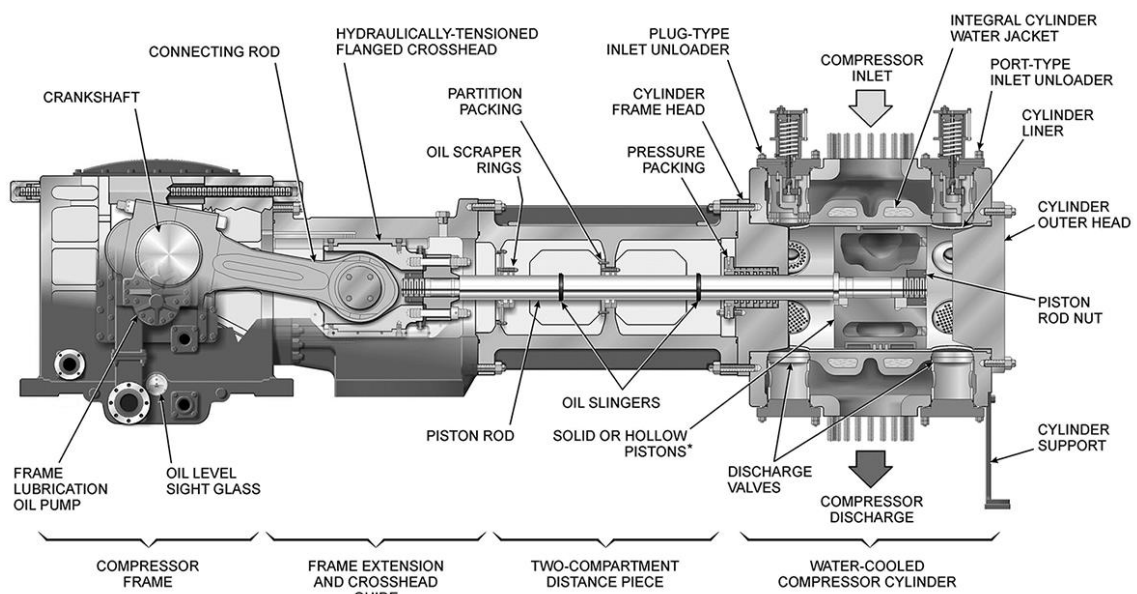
Sketch of a single-acting reciprocating compressor [41]
